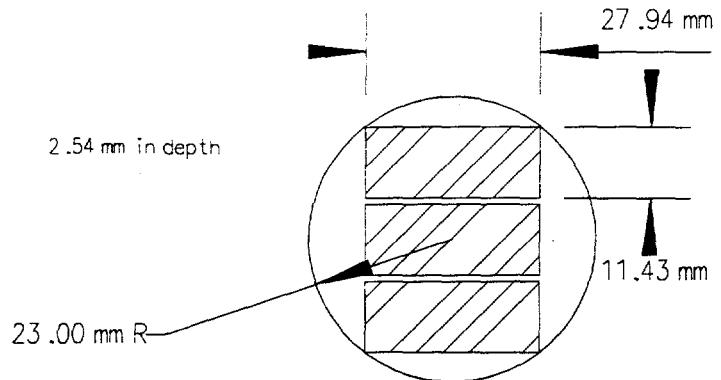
Schematic drawing of chevron-notched short rod specimen.
